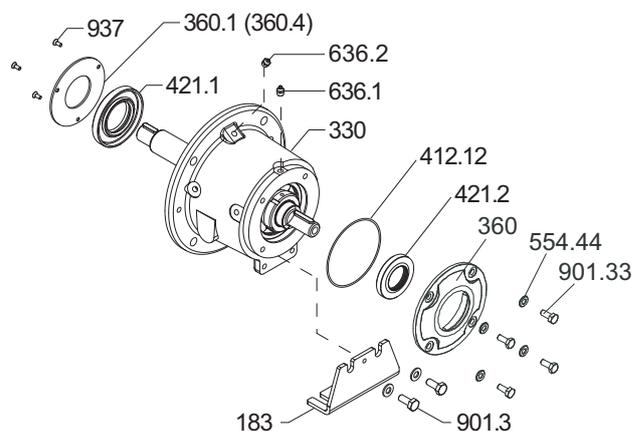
Dismounting the bearing bracket (grease lubrication)
